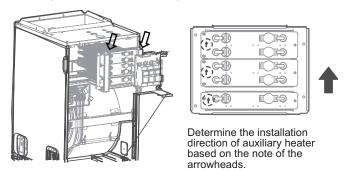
Push Auxiliary Heater Horizontally into Air Handler
